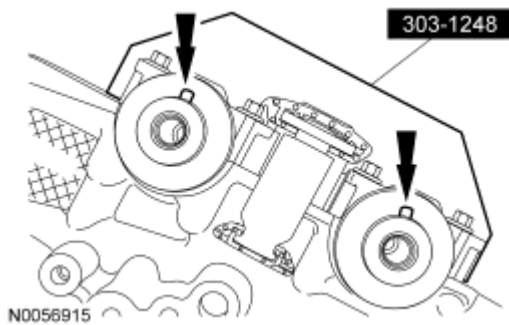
Installing Special Tool (303-1248) On Flats Of Camshafts
